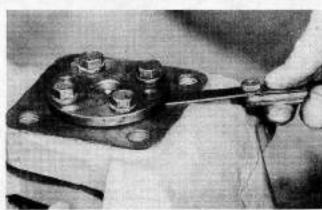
View showing proper use of feeler gage to measure gap between bearing pin flange and stub axle. Messure at four locations.
